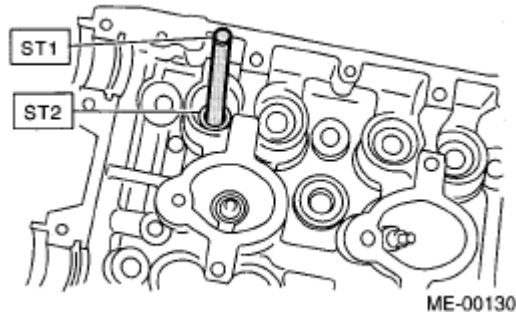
Identifying Valve Guide Remover And Valve Guide Adjuster
